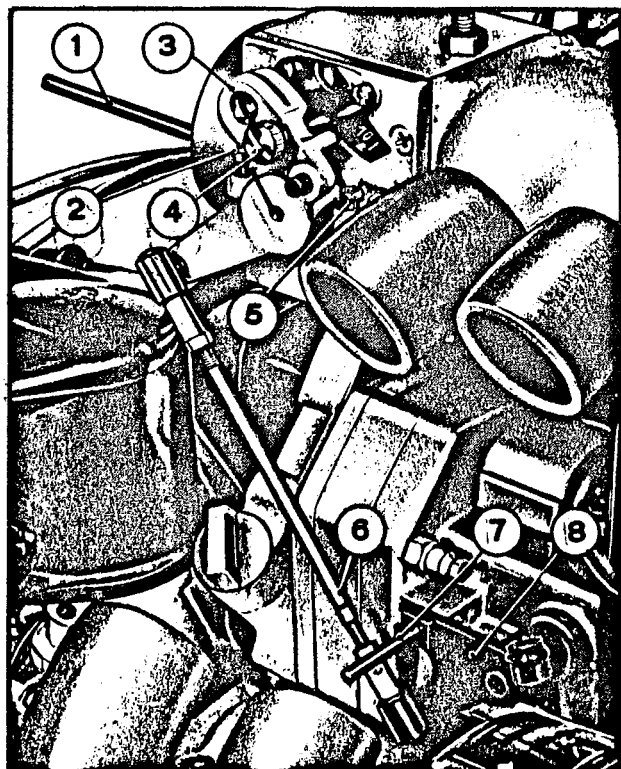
Synchronizing the Butterfly Valve / Injection Pump Operation.
